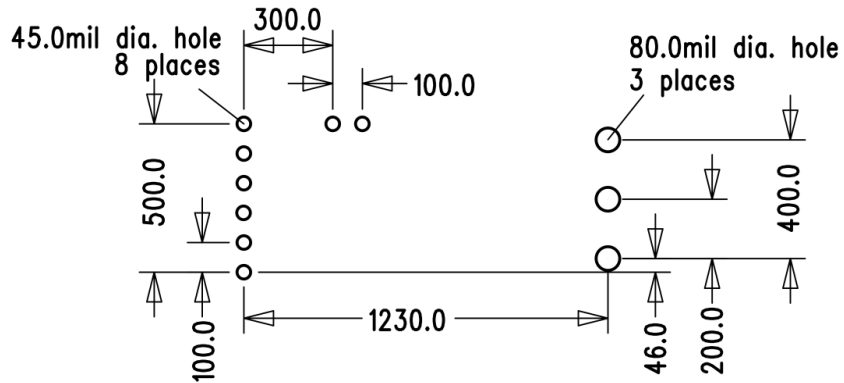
NCP51705 SiC Driver Mini EVB PCB Hole Pattern (All Dimensions in mils)
